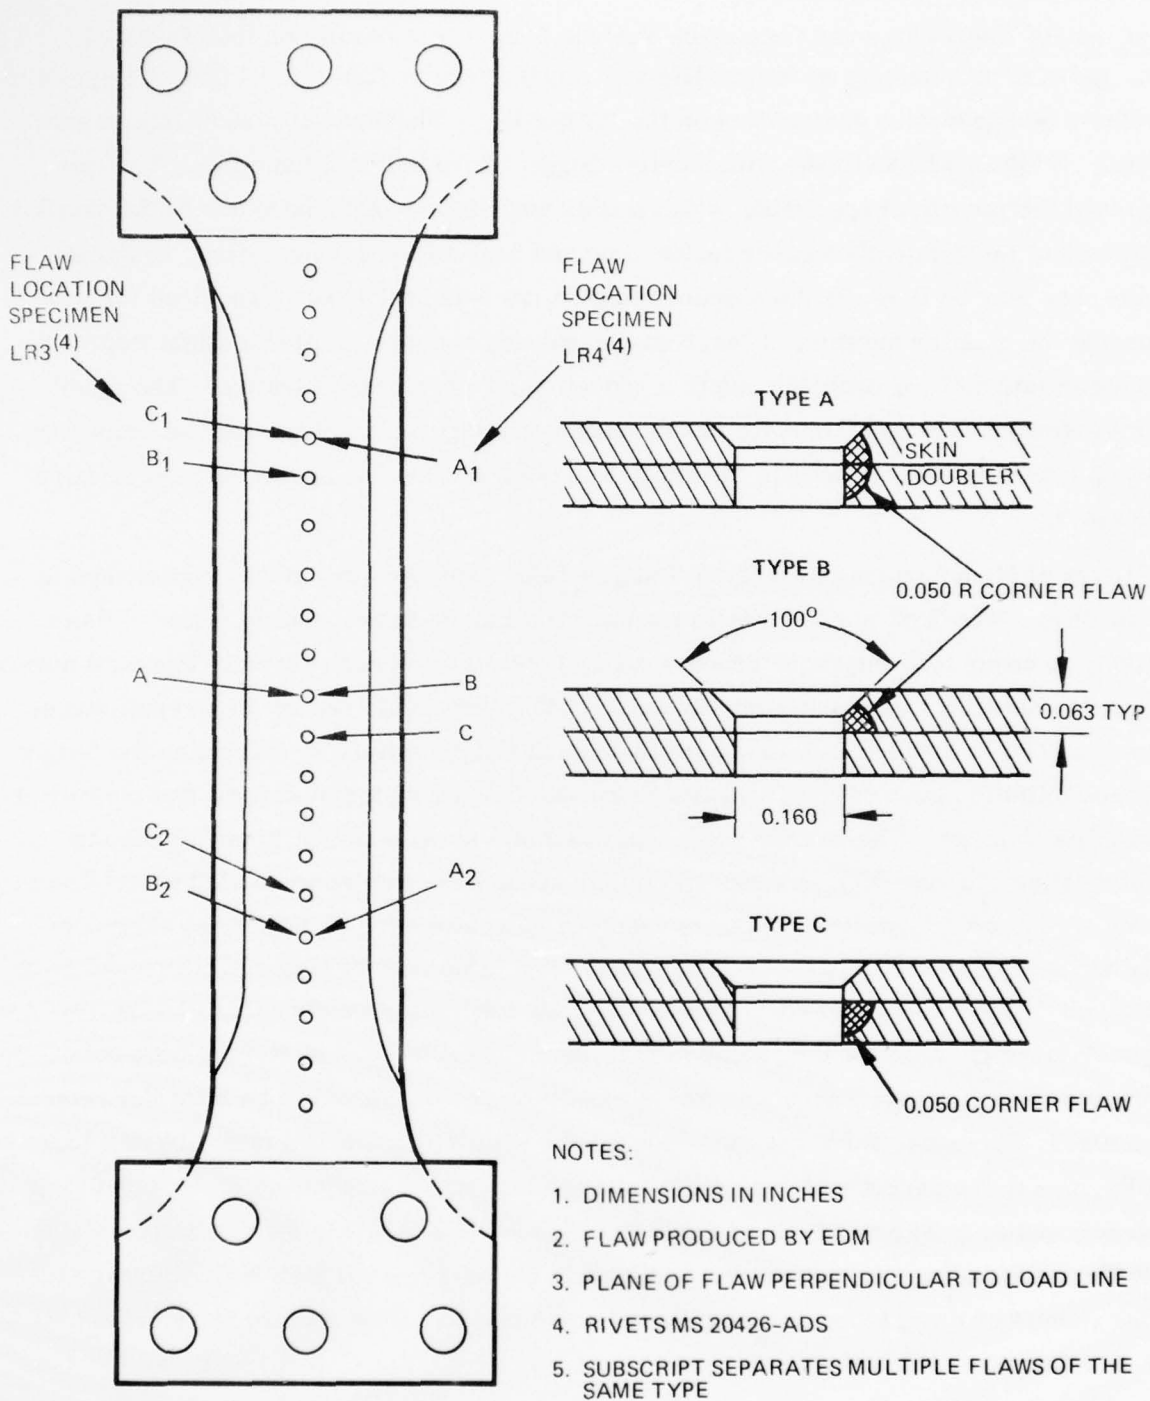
LOW-LOAD TRANSFER FATIGUE SPECIMEN FOR PREFLAWED RIVET HOLE TEST
